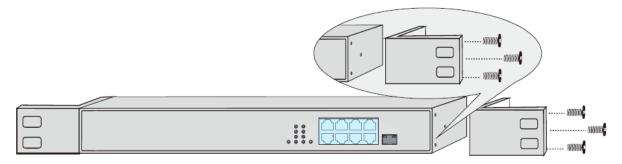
Install L-Shaped Bracket (for DS-3E0509)
